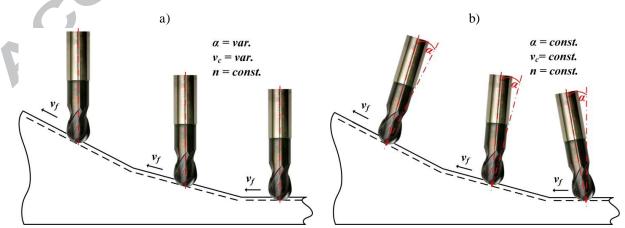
Ball end milling strategies: a) with variable cutting speed and surface inclination angle along the toolpath; b) with constant cutting speed and surface inclination angle along the toolpath
